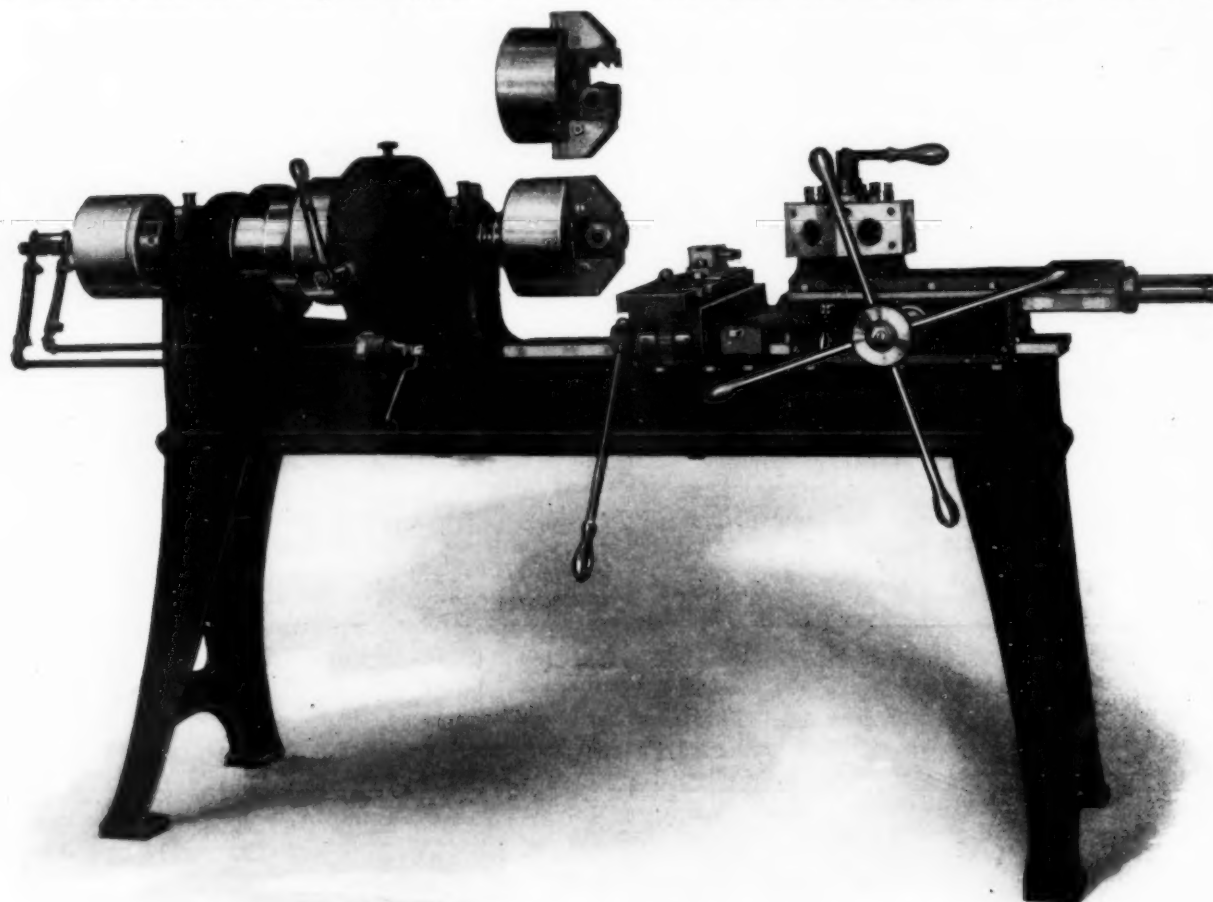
A UNIVERSAL CHUCK WITH JAWS CLOSED AND A DOUBLE-ACTING CYLINDER ADAPTED TO A TURRET LATHE, MADE BY HANNIFIN MANUFACTURING COMPANY, CHICAGO, ILL.
